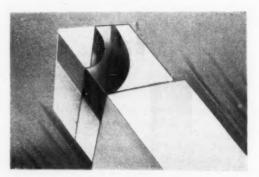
Form Tool with Concave Radius Produced from a Standard Bar Turning Tool
